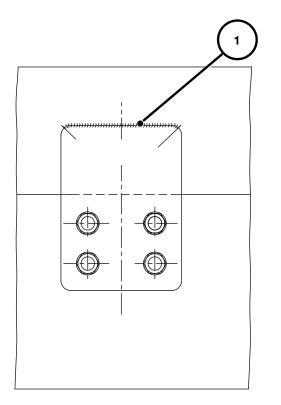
IV: Welding distance in cold-formed areas
